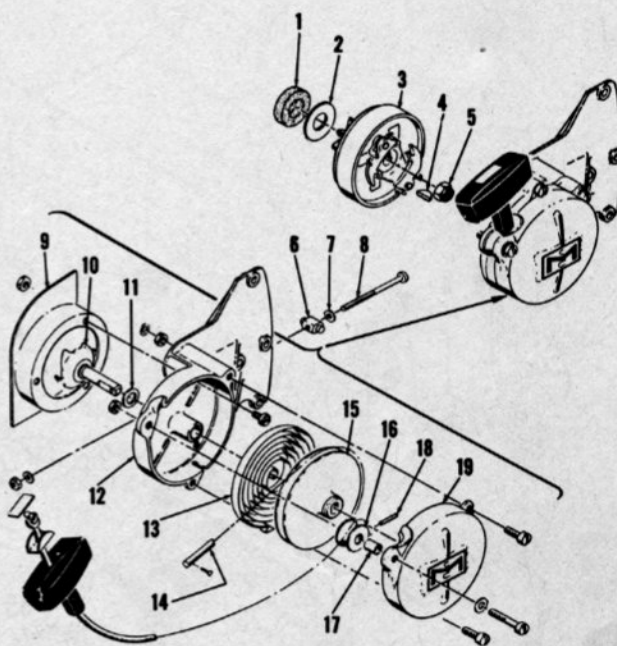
View showing disassembly of clutch and starter assemblies used on models 440, 740, 790, 795, 797 and Super 797.
